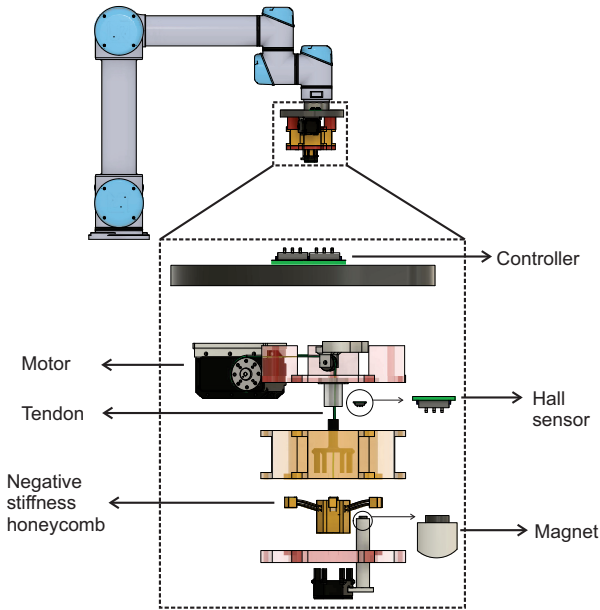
Experimental setup: robot arm (UR5) with an exploded view of the attached active tactile sensor. The sensor consists of a 3D-printed negative stiffness honeycomb, Hall-effect sensor, neodymium magnet, microcontroller board, servo-motor (Dynamixel MX-106), tendon (spectra tendon), a pulley, a linear bearing, and guiding 3d-printed parts. The servo-motor controls the displacement of honeycomb beams by adjusting the tendon's tension. A Hall sensor measures the distance to the magnet, which is proportional to the beam's displacement.
